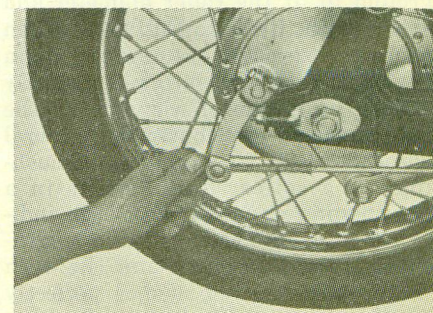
An adjuster nut is provided at end of rear brake rod on some models as shown. Adjustment of other models may be similar to front wheel shown in Fig. 2-41.
